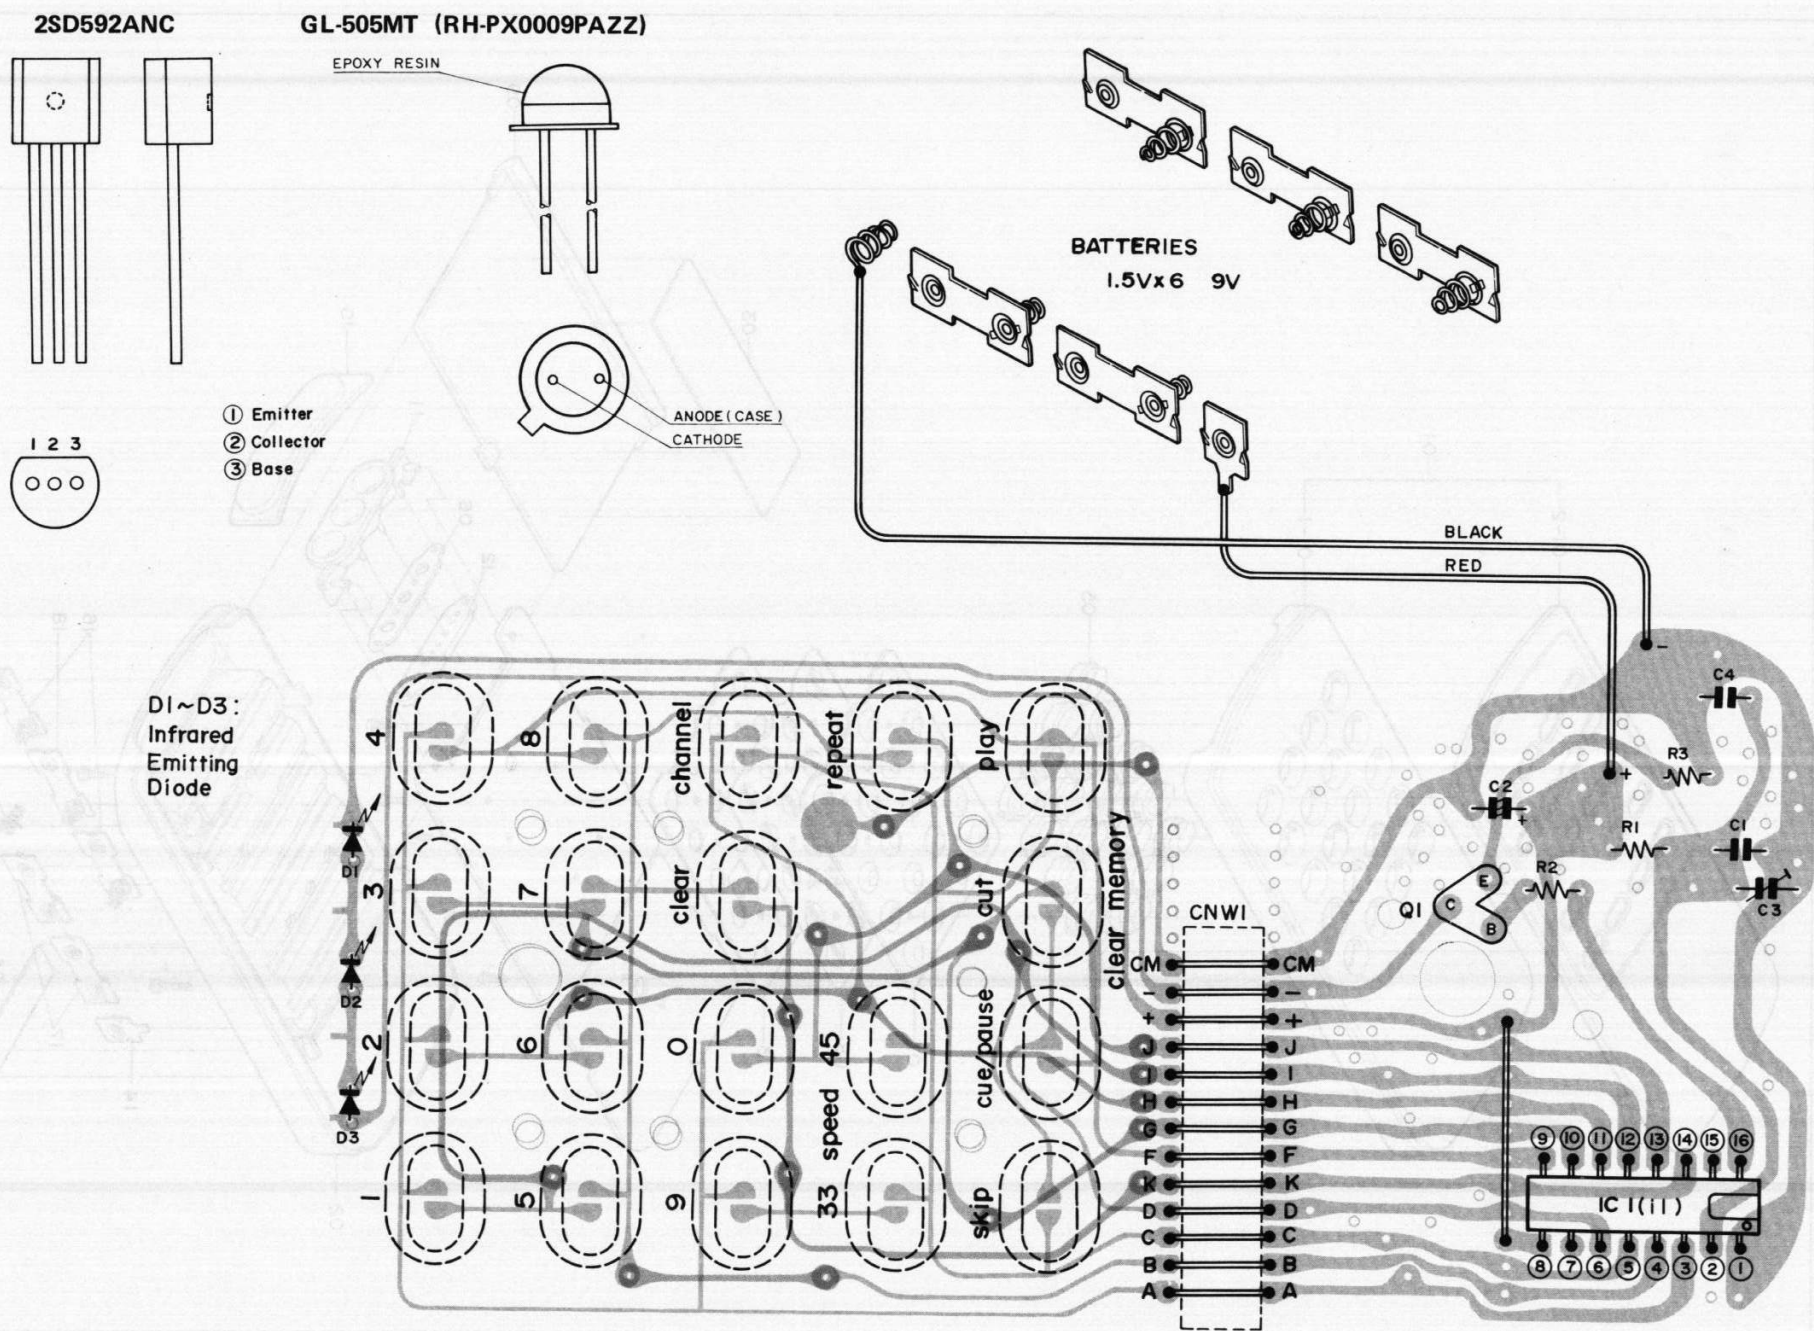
WIRING SIDE OF REMOTE CONTROL P.W. BOARD
